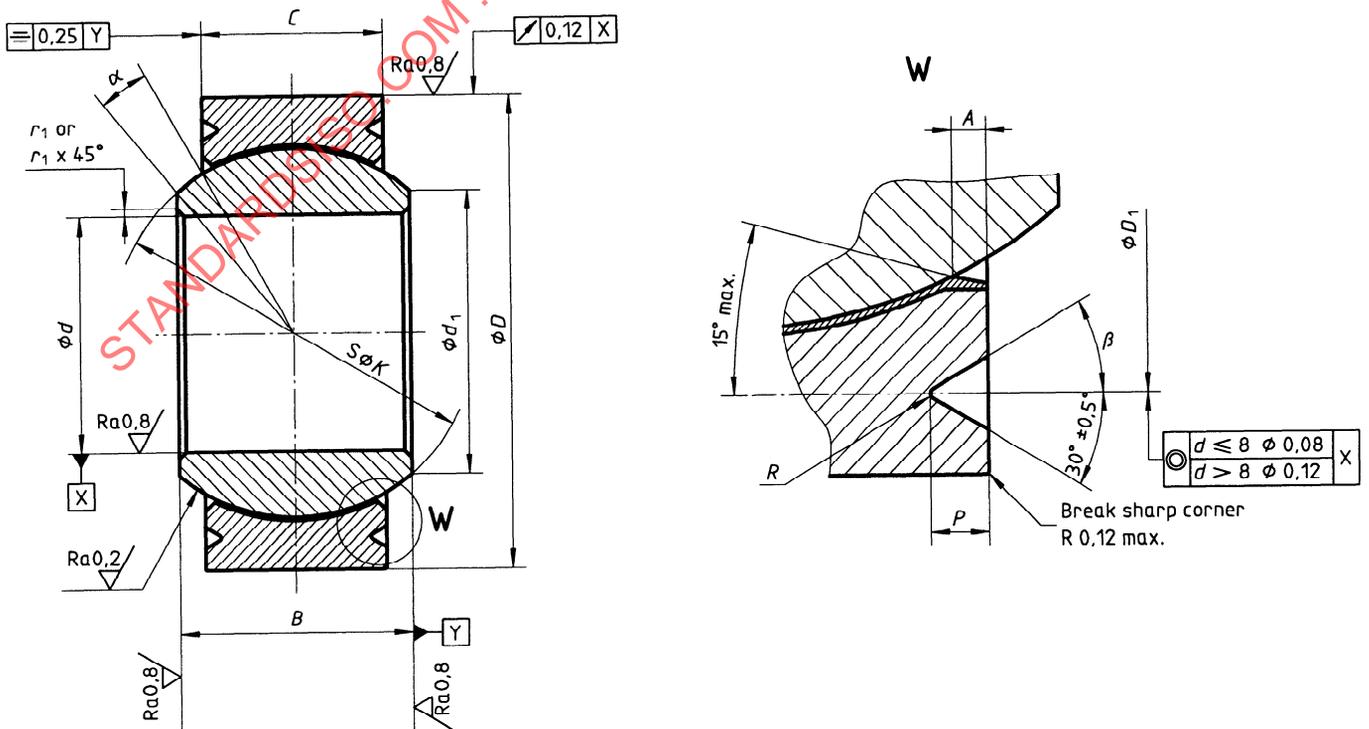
Spherical plain bearing with self-lubricating liner with face groove
